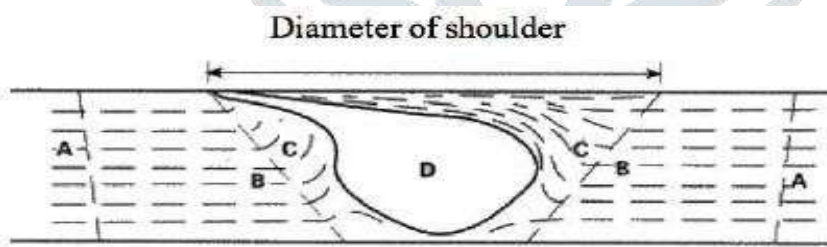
Schematic cross section of a typical FSW weld showing four distinct zones: (A) Base Metal (B) Heat Affected (C) Thermomechanically affected and (D) Stirred (nugget) zone.
